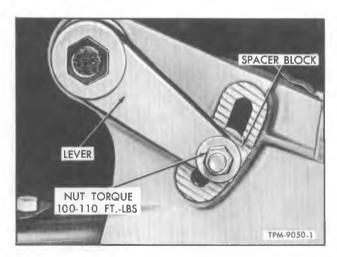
Torsion Bar Tension Adjustment Lever Installed
